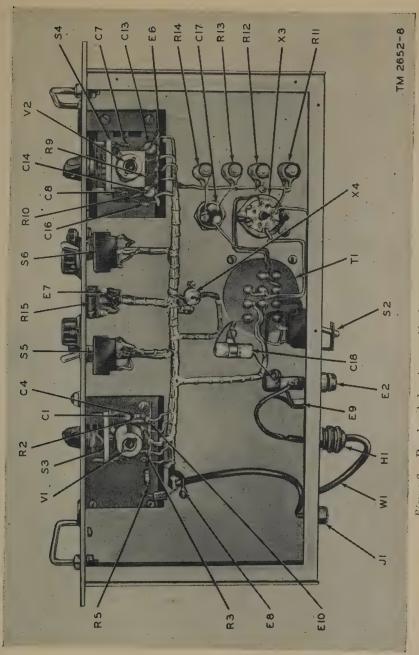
Panel and chassis assembly, bottom view, cover plate removed.
